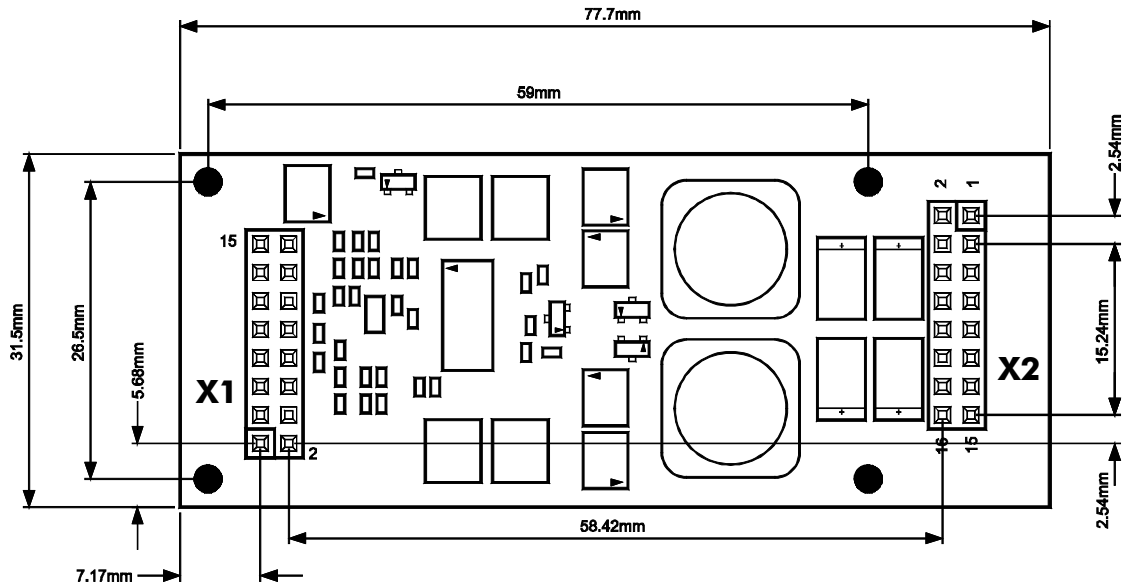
Mechanical Drawing PCB mount header version (standard): top view
